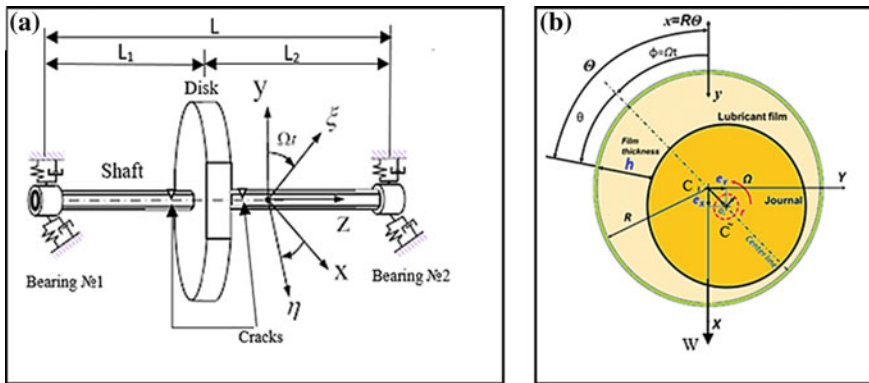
a Bearings representation by rotor springs and dampers, b Sliding bearing: eccentricity between shaft and bearing
